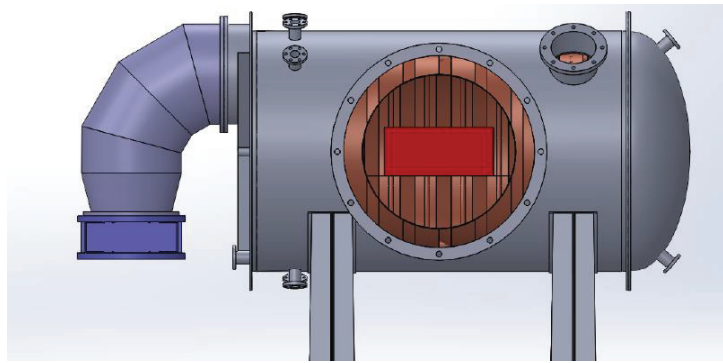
Prototype chamber with high vacuum manifold and upper part of the supporting system
